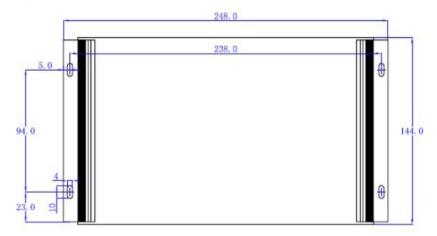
detail geometric structure of ADM-210 (unit mm)
